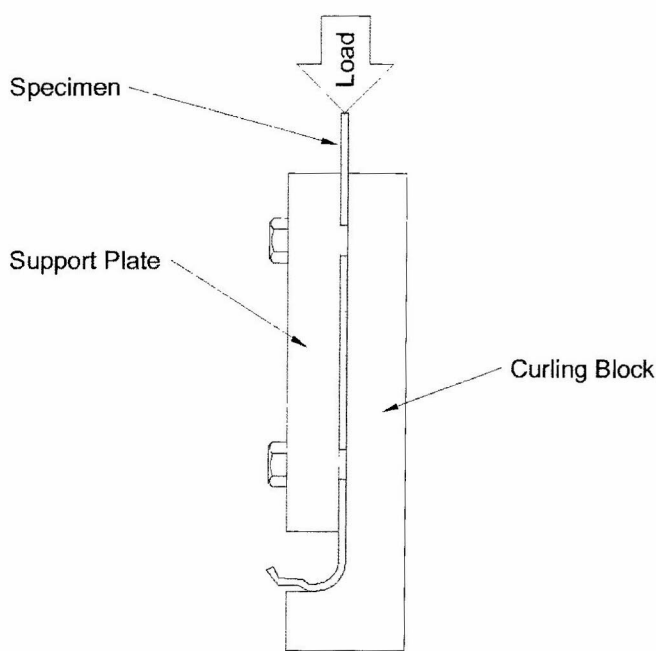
Representation of the test fixture developed at Nihon University for crushing flat coupon specimens<sup>40</sup>. The inset diagram reveals the specimen and the manner in which it is supported and loaded.
